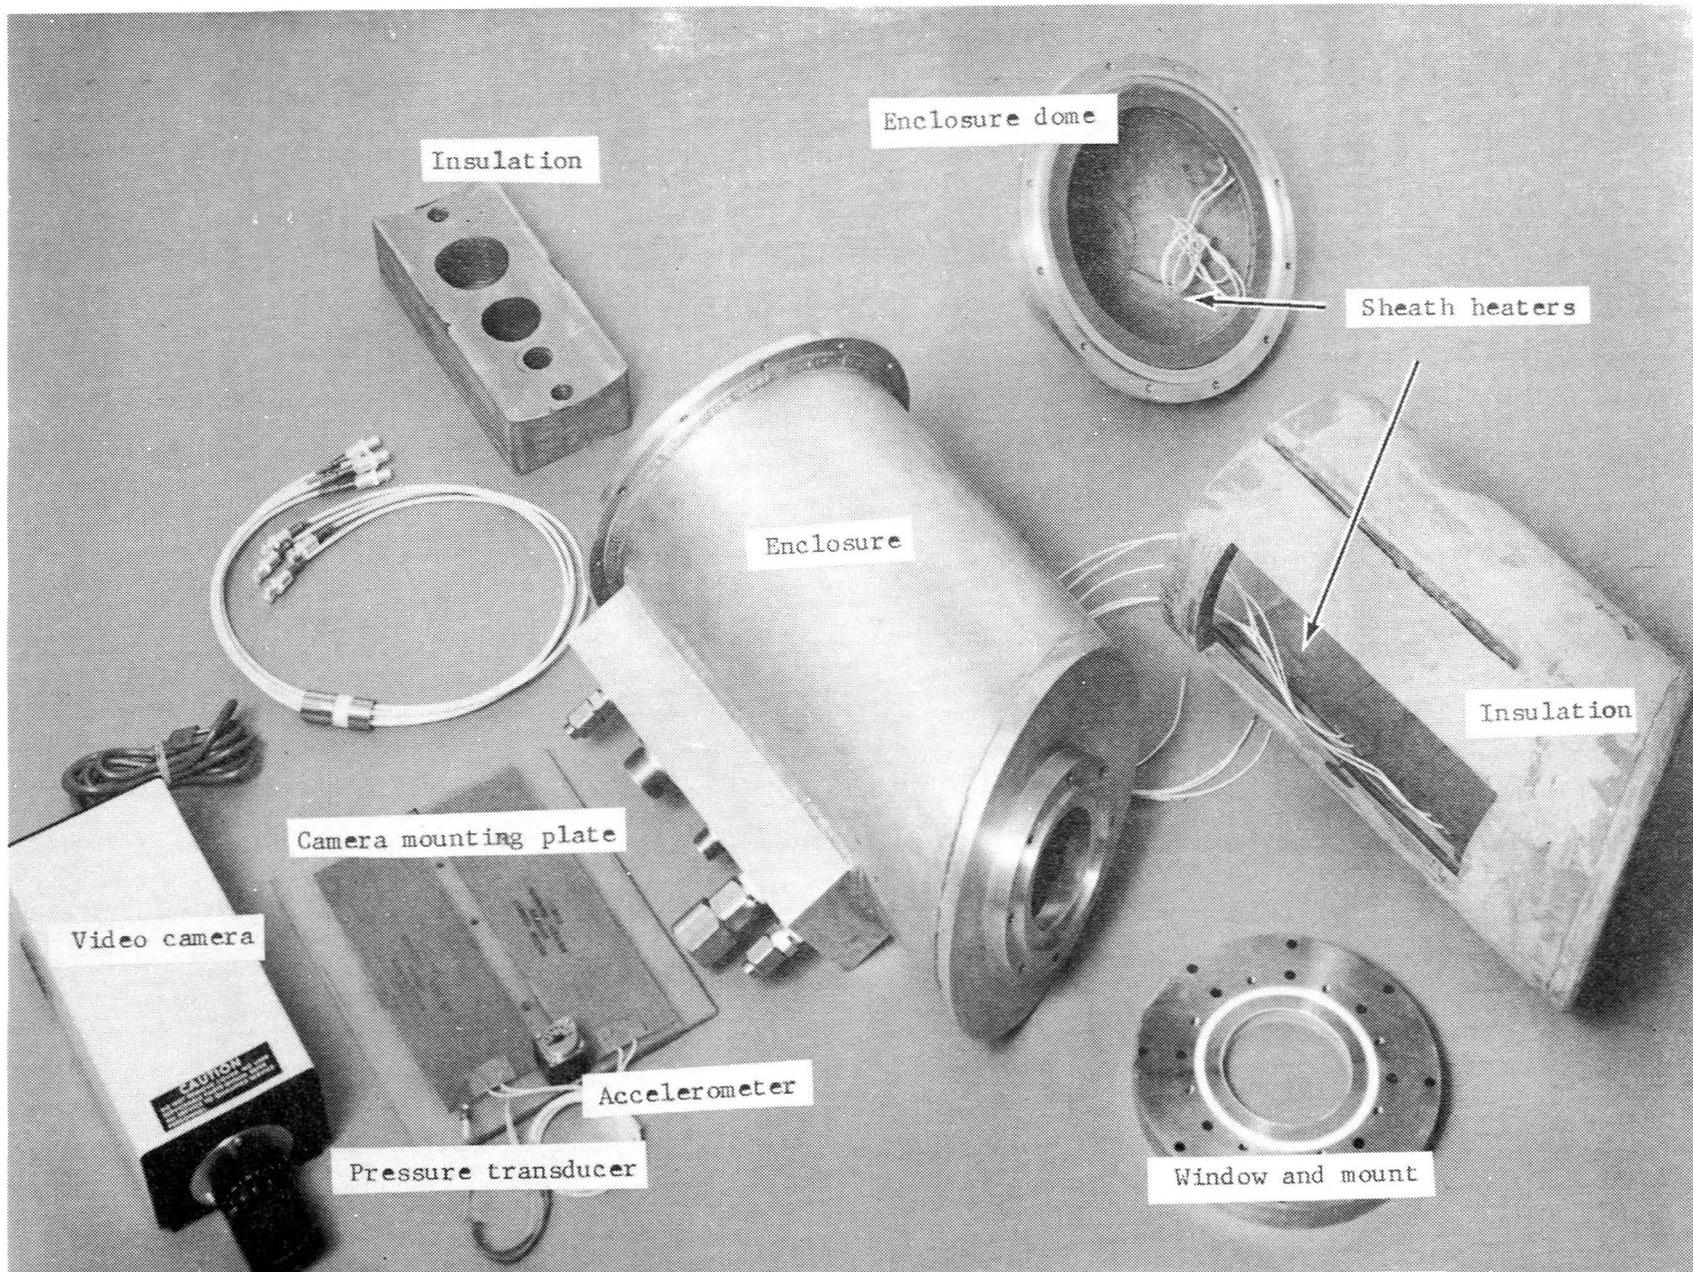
Exploded view of camera housing to show insulation and heating pads.
